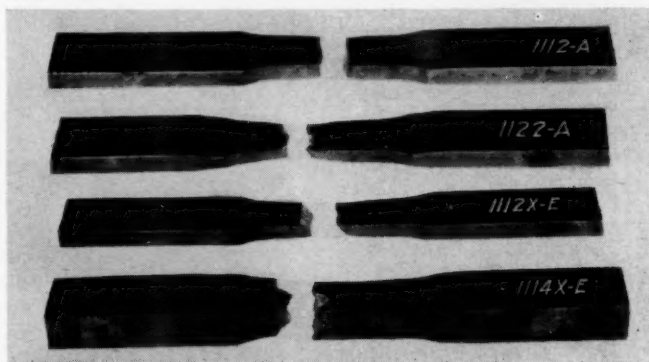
TENSION TESTS MACHINED IN ACCORDANCE WITH WELDING ENGINEERING DEPARTMENT OF GENERAL ELECTRIC CO. AND A.S.M.E. BOILER CODE.
